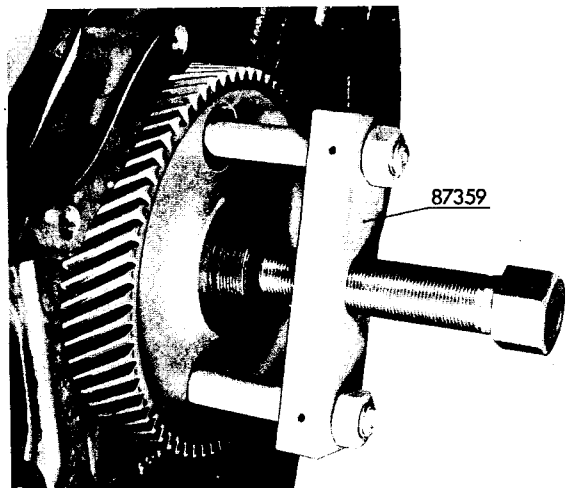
Puller for pump gearwheel and camshaft gearwheel
